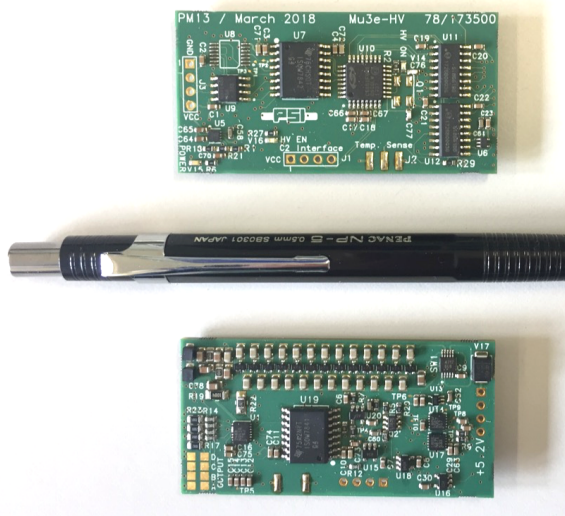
Prototype of the high-voltage generator board with top side (upper picture) and bottom side (lower picture).
